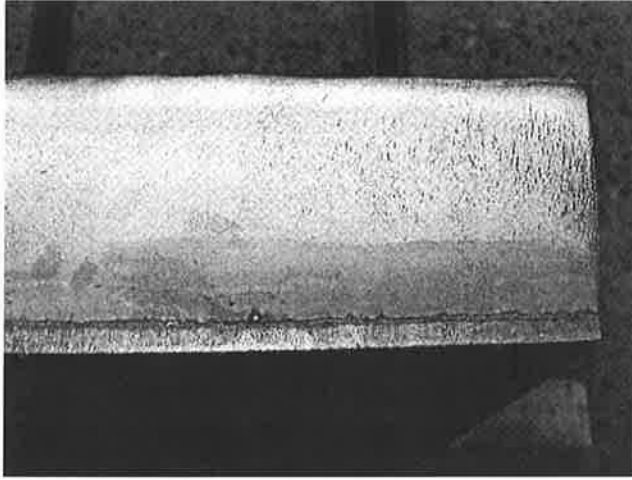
Fracture surface of tensile loaded test specimen.
